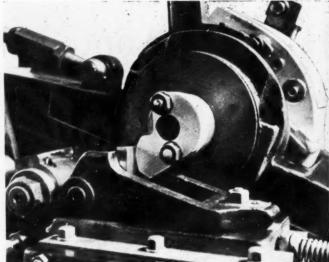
Left—Rear view of full automatic gear grinder showing main drive, for operating mechanism, wheel and cutting compound pump Fig. 3—Above—Close view of master involute tooth, its mating abutment and adjustment for pressure angle control
